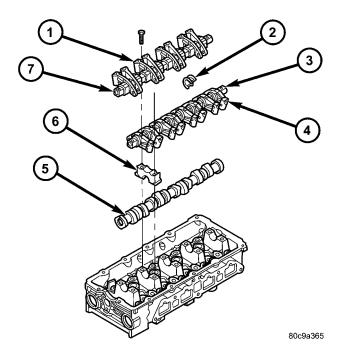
Rocker Arm Shafts/Lash Adjusters/Camshaft
